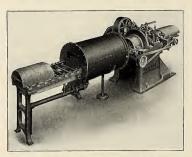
R. Hoe & Co.'s Automatic Curved Stereotype Plate Finishing and Cooling Machine.
